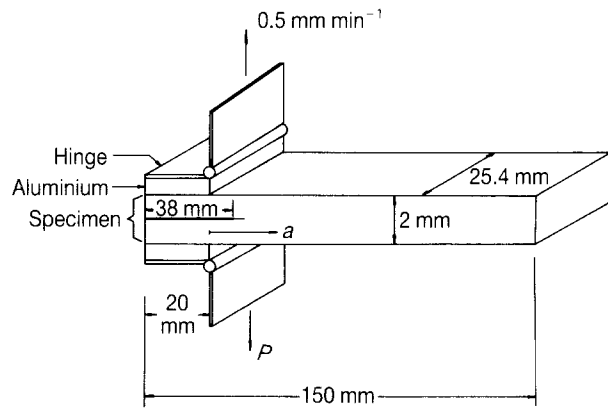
Geometry of the double cantilever beam specimen used for the measurement of fracture toughness.
